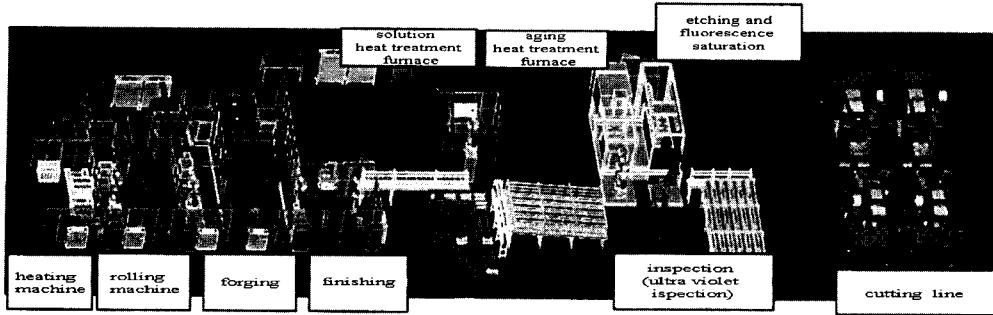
Schematic drawing of one stop materials processing line of Toyota automobile company
